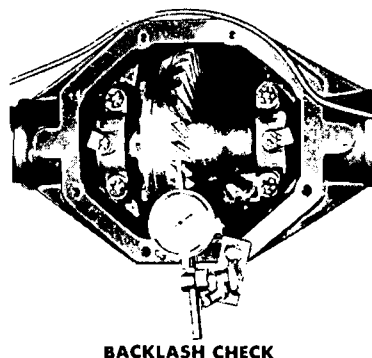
Checking Backlash and Runout—Integral Carrier Type Axle
